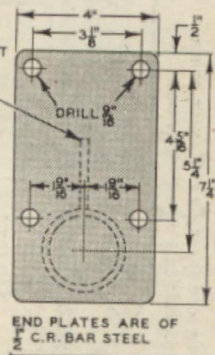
Alloy steel bolts 9/16 by 1 3/4 secure spindle to end plate.
